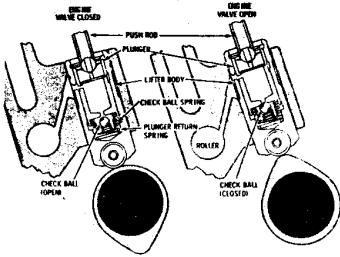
An example of roller hydraulic lifters on a v-type engine.
